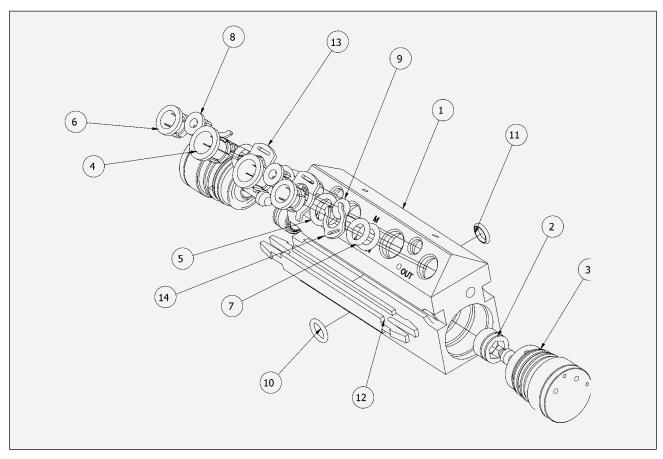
A10727 (Metric) & A10953 (English) 2-Color Valve Circulating Assembly
